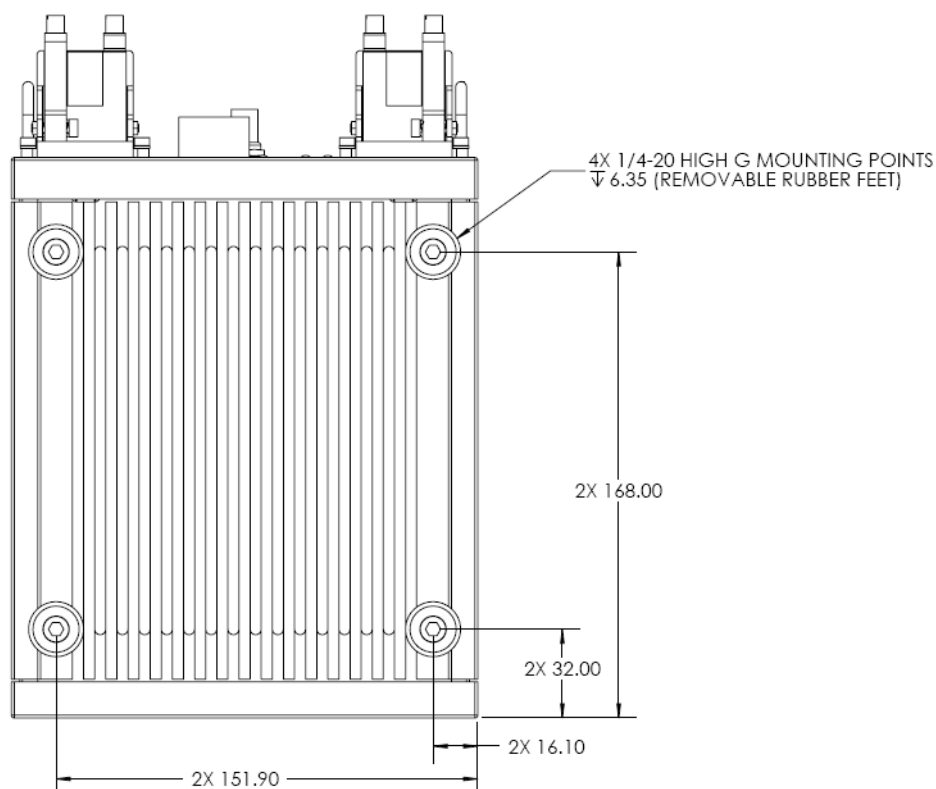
HG-TH Controller mounting holes, bottom (in mm)
